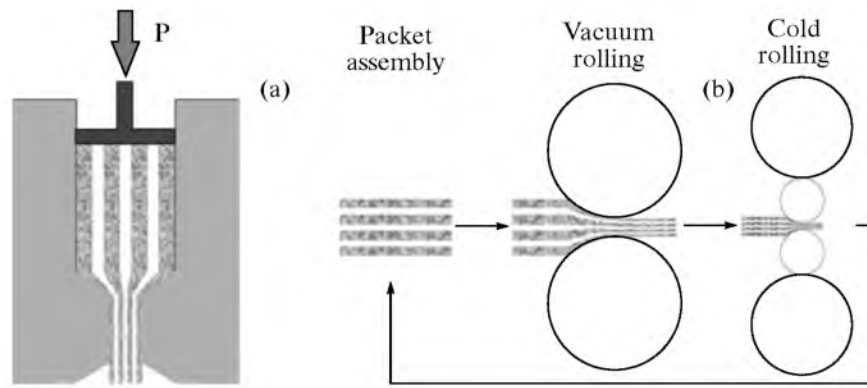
Schemes of (a) batch hydroextrusion and (b) multiple roll welding.
